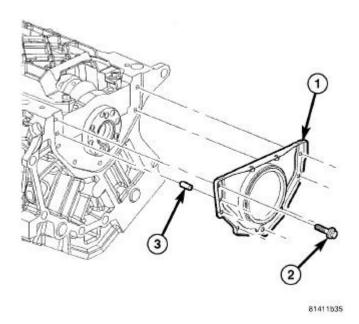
REAR CRANKSHAFT OIL SEAL AND RETAINER Courtesy of CHRYSLER LLC
